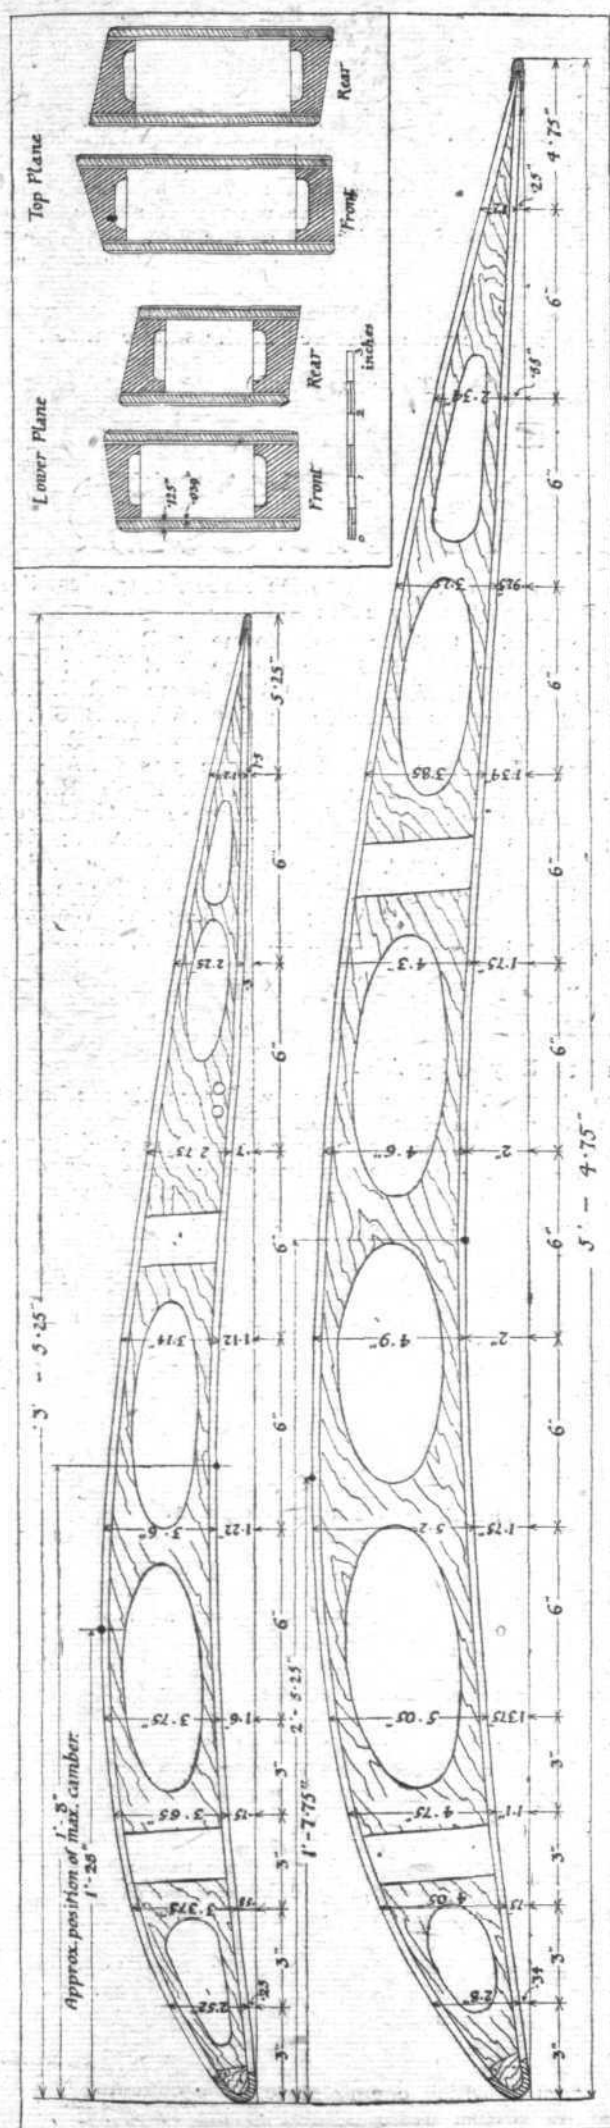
Upper and lower wing sections of the Pfalz. Inset sections of the wing spars.
